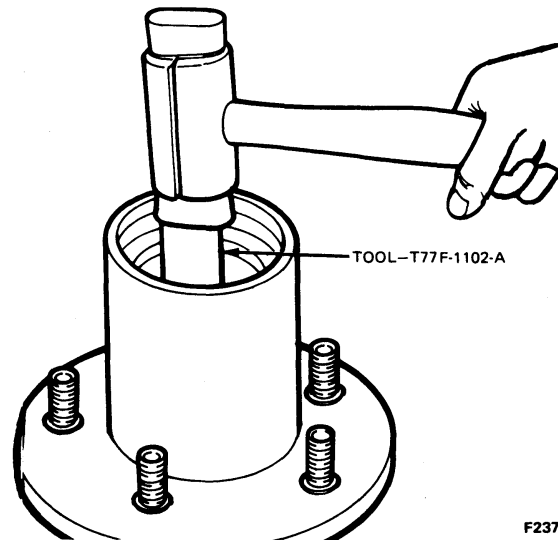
Inner Bearing Cone and Grease Seal Removal
